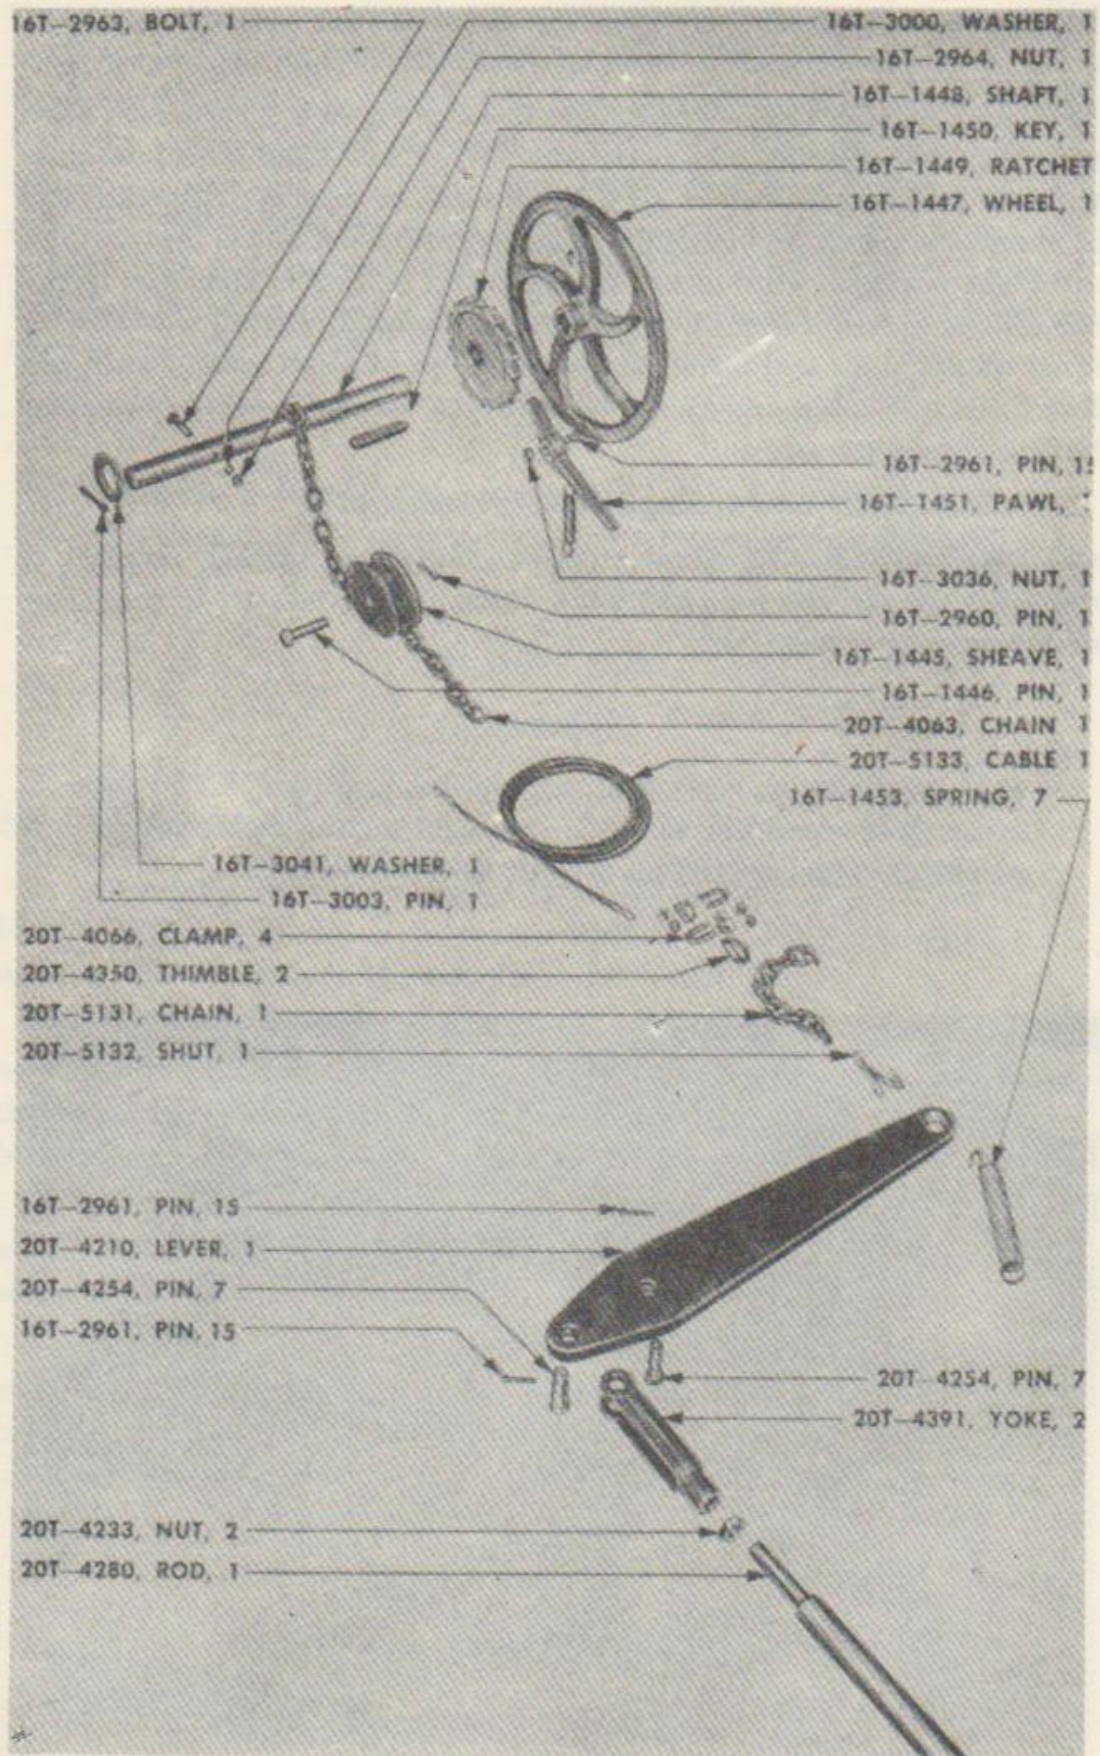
HAND BRAKE—EXPLODED VIEW
